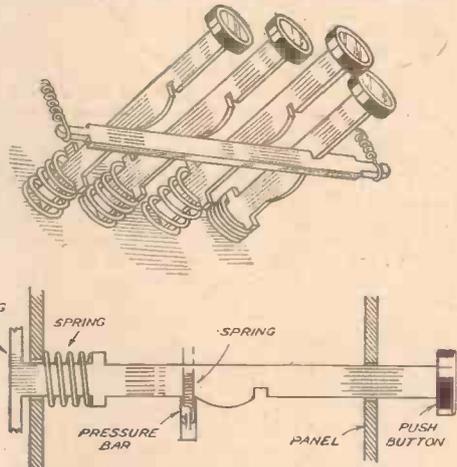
How you can build a push-button tuner—with a detailed illustration of the separate push rods.
